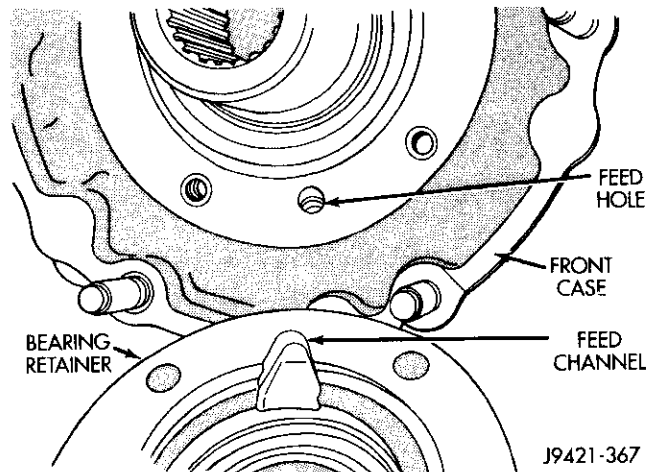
Aligning Retainer Oil Channel and Case Feed Holes
